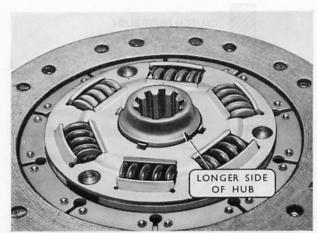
Clutch disc, showing the longer side of the hub which must be installed away from the flywheel
